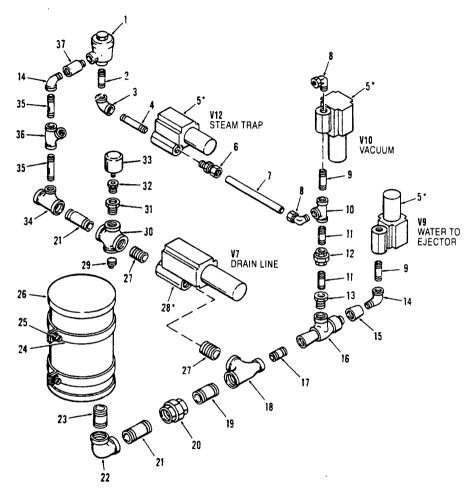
STAND PIPING ASSEMBLY (Part 1 of 2).
